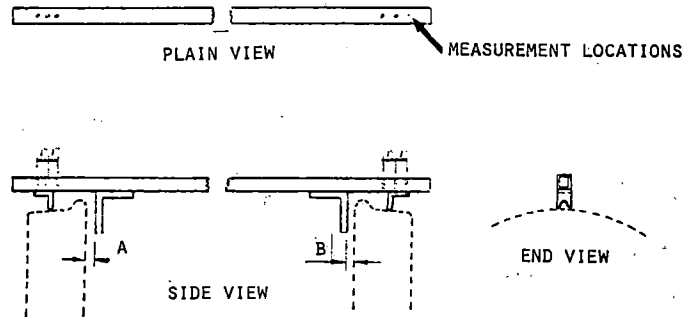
CONE ANGLE MEASURING FIXTURE.
